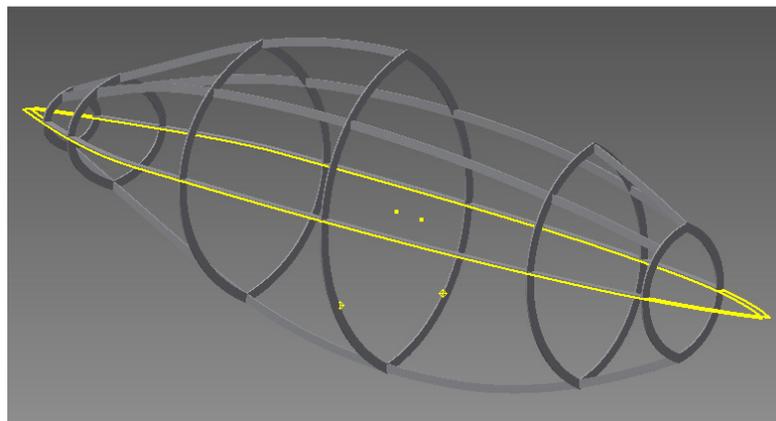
ORIGINAL STRUCTURAL FRAME
